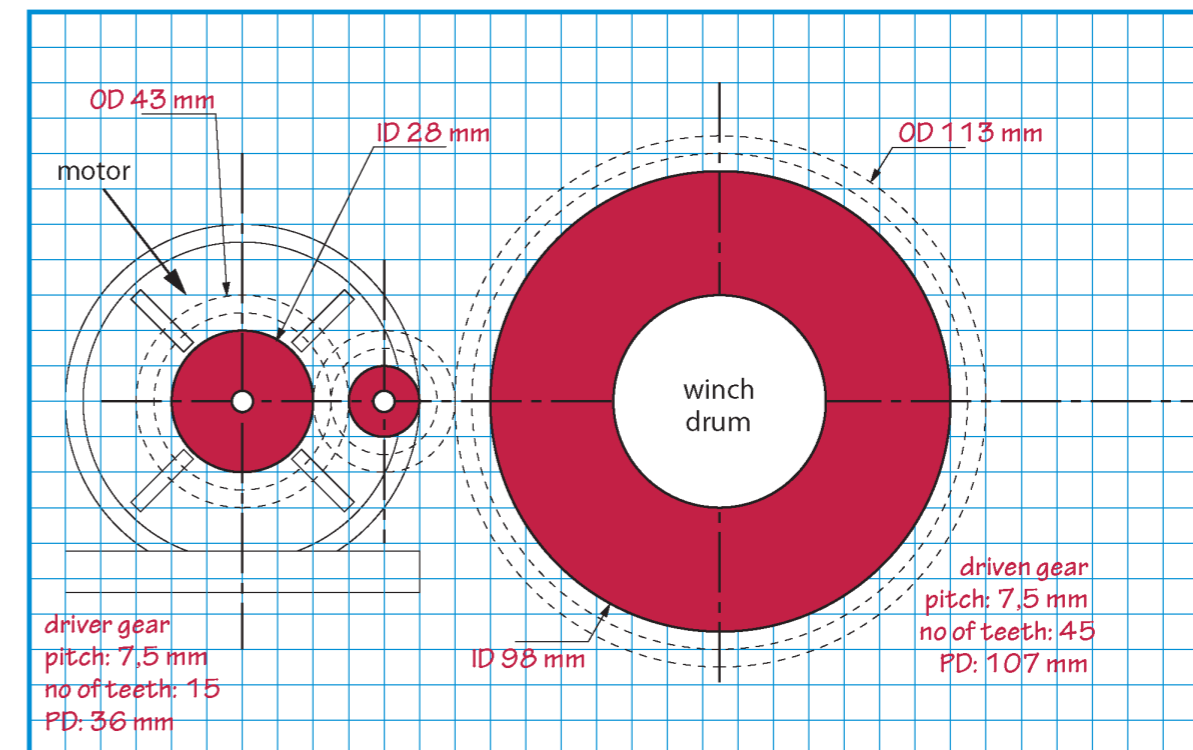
Copy and complete this drawing to show how you will improve the winch.
